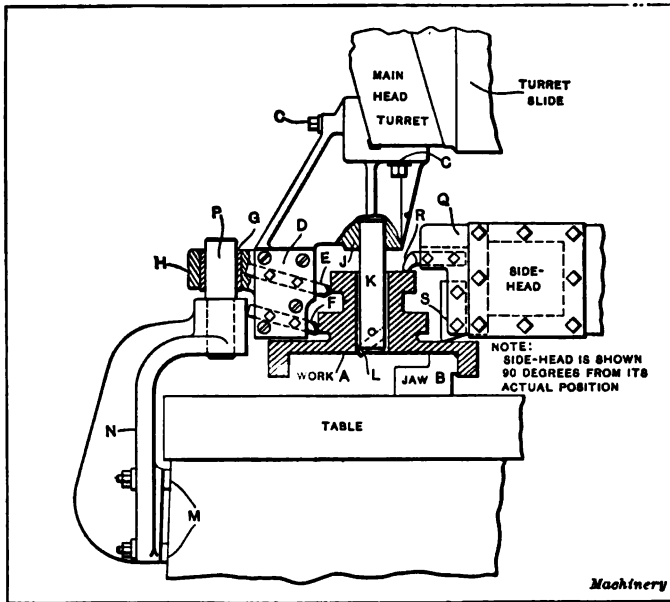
Piloted Multiple Turning Tool for Triple Gear Blank
